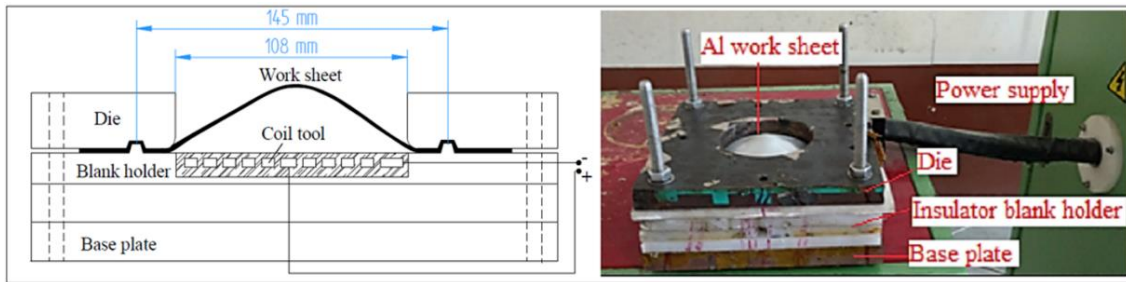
Schematic of EMF fixture with actual EM forming setup.
